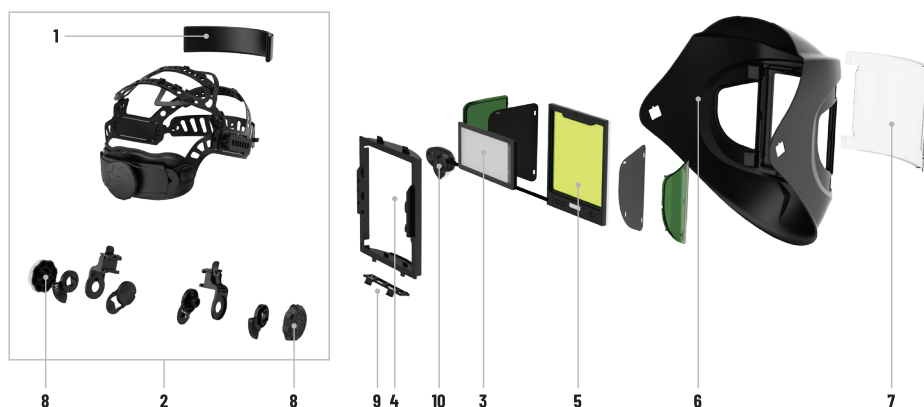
Exploded View of ArcMaster Auto-Darkening Welding Helmet
